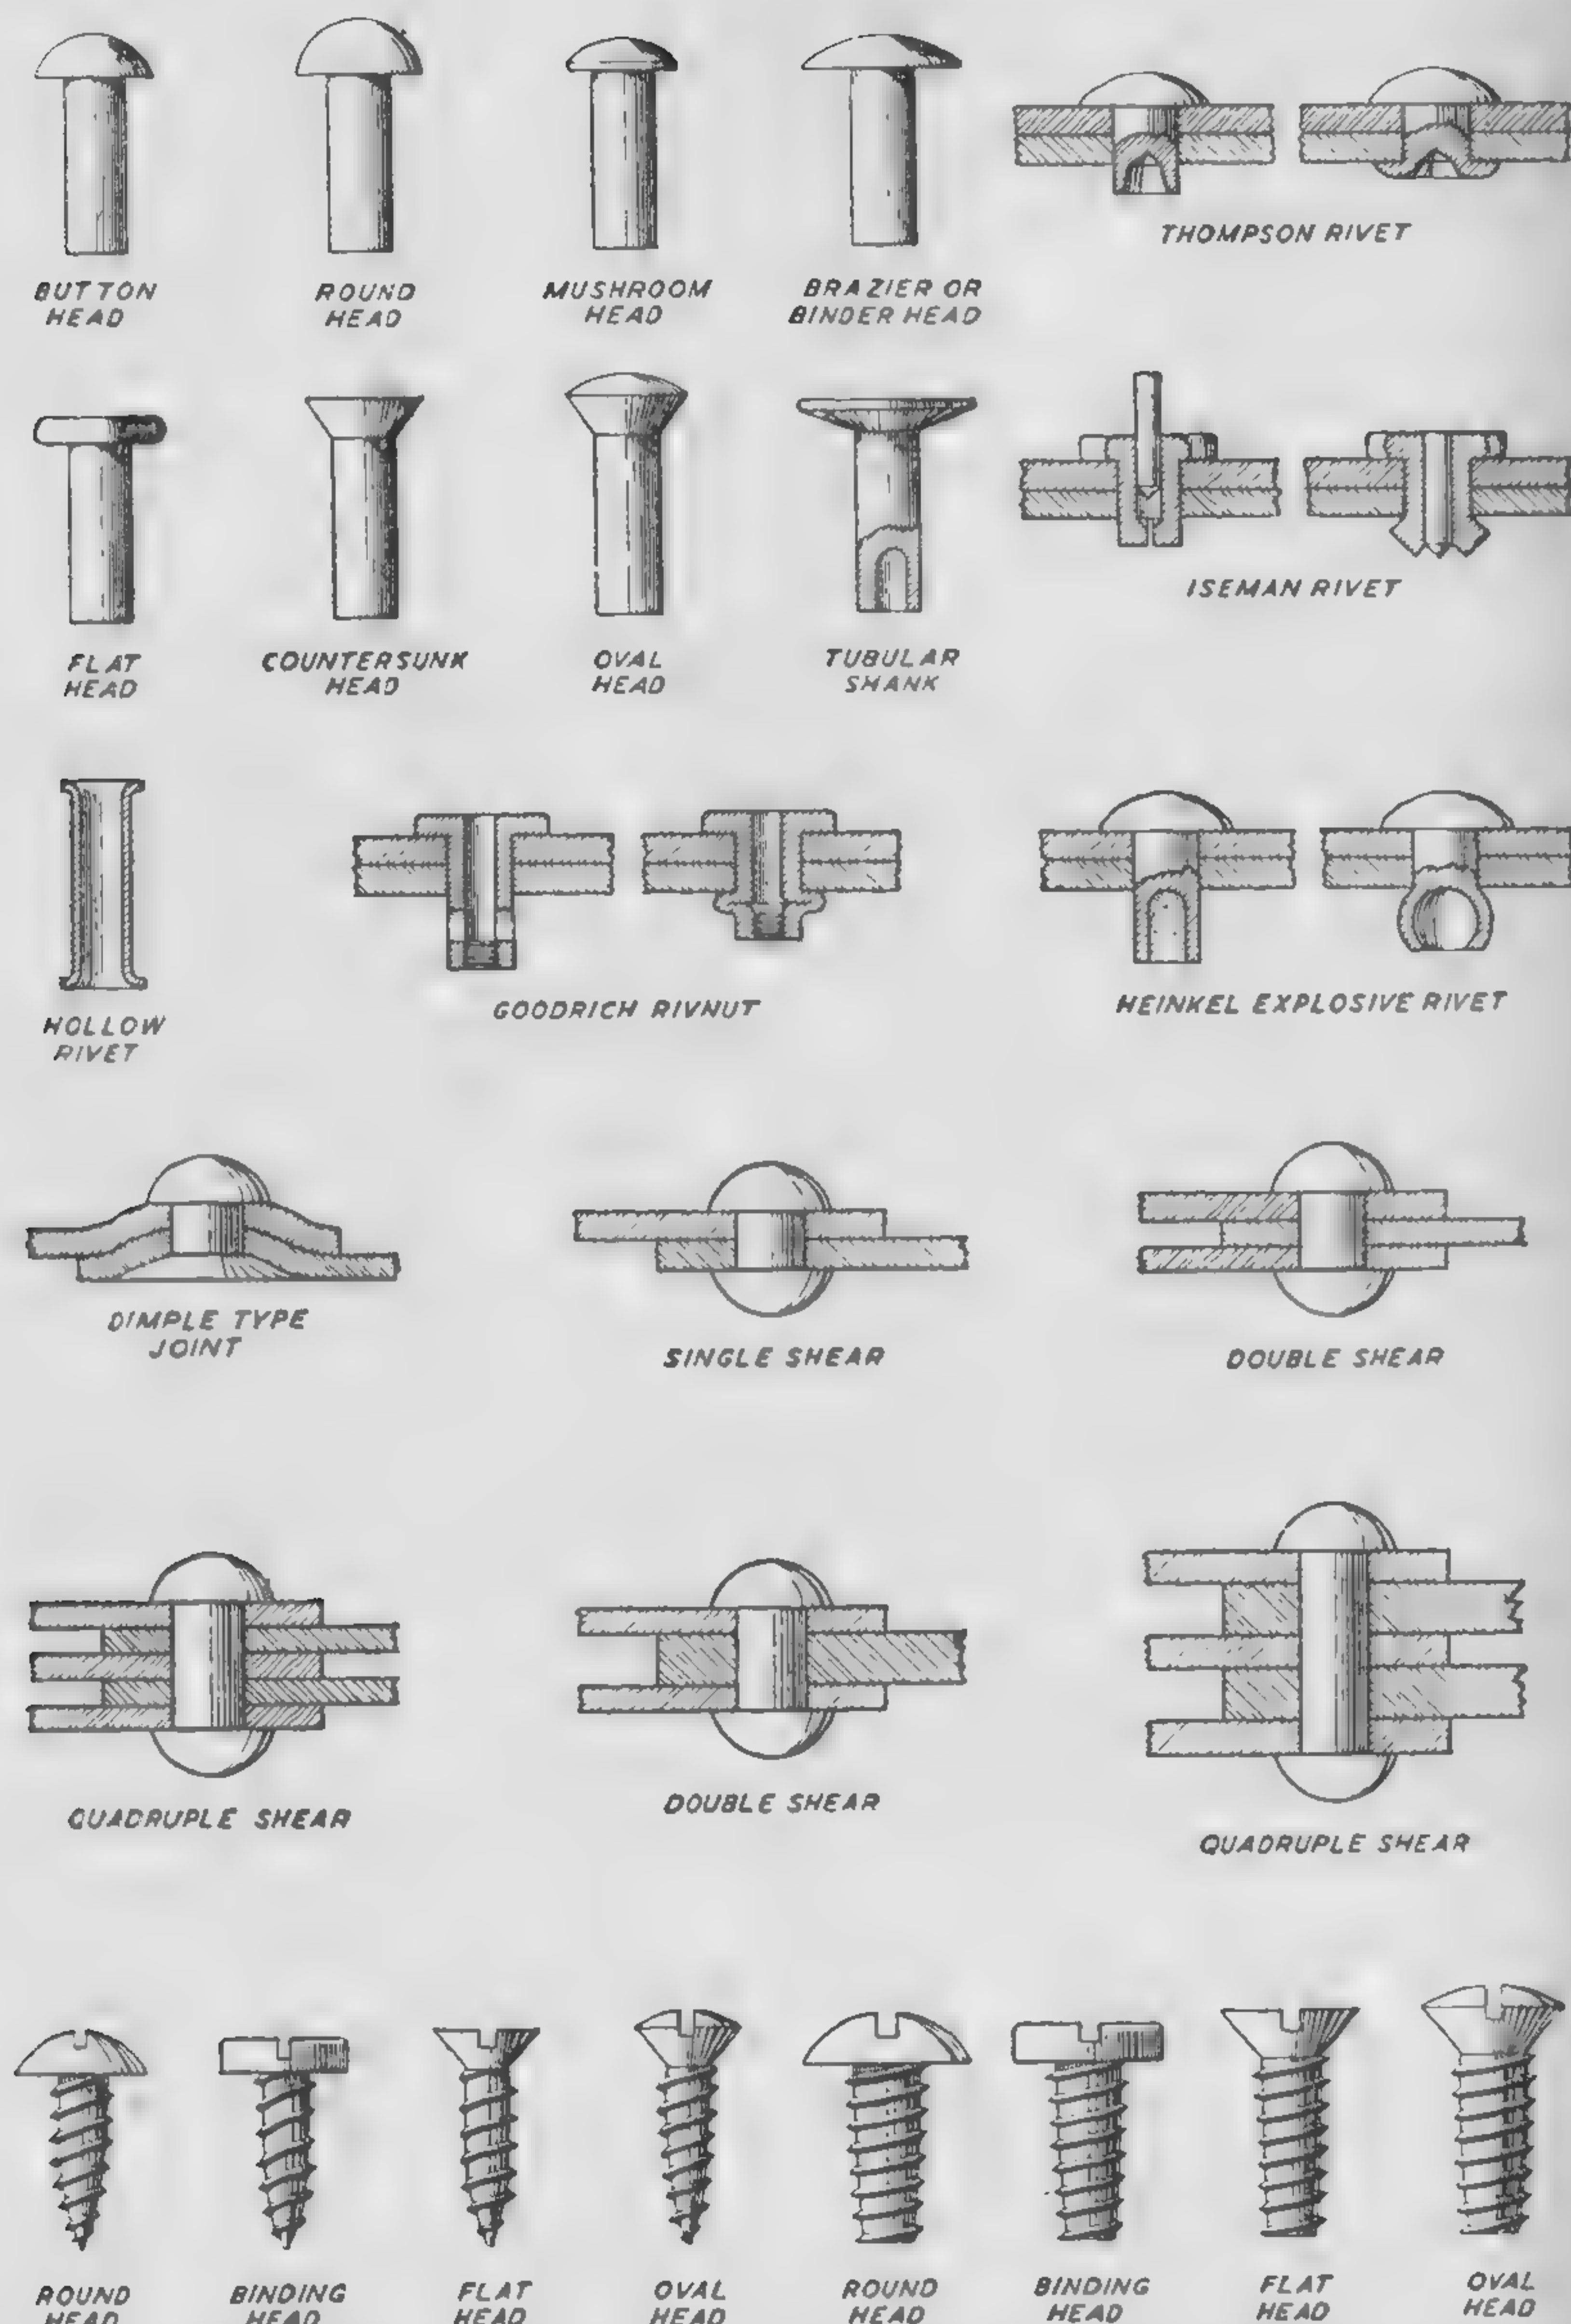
Types of Rivet Heads and Screws Used in Commercial Aeronautics. The Screws Shown at the Bottom of Fig. 46 Are Parker Kalon Cutting Screws Used for General Repair Work
